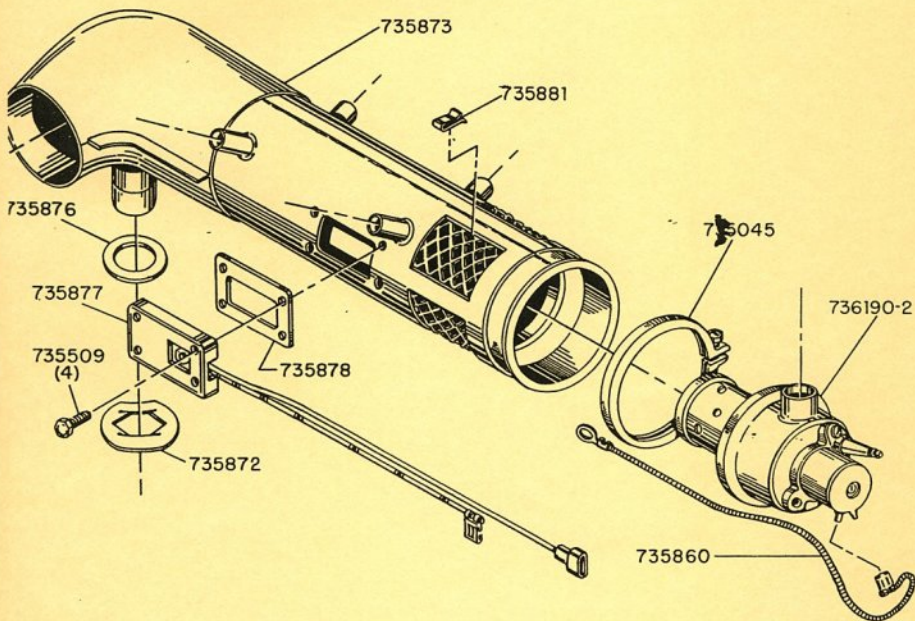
HEATER ASSEMBLY FOR KIT MODELS 735900 & 8341
